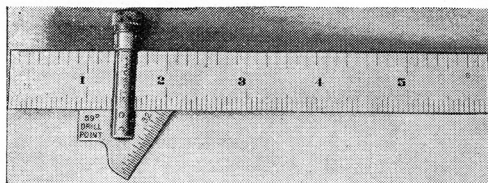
Drill gage attachment for ordinary hook rule or straight steel rule. Checks both length and angle of drill lips.
